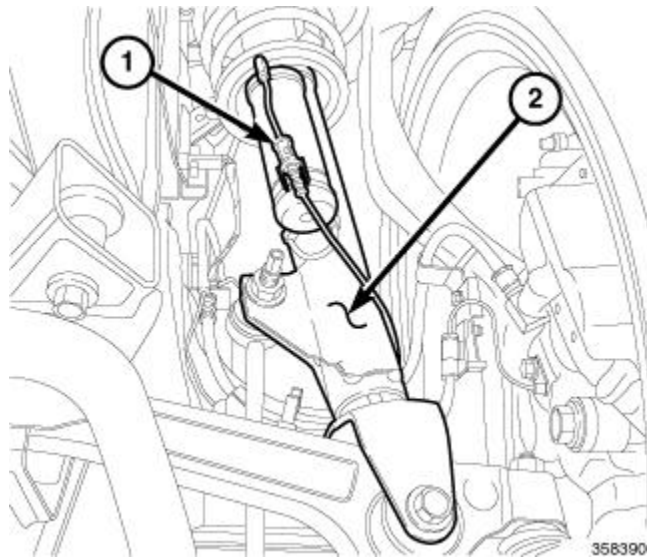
Front Shock Assembly & Shock Solenoid Assembly
